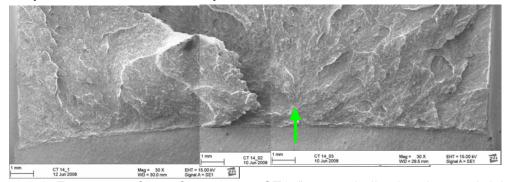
Fracture surface of specimen "CT14", arrow indicating the crack initiation site.
